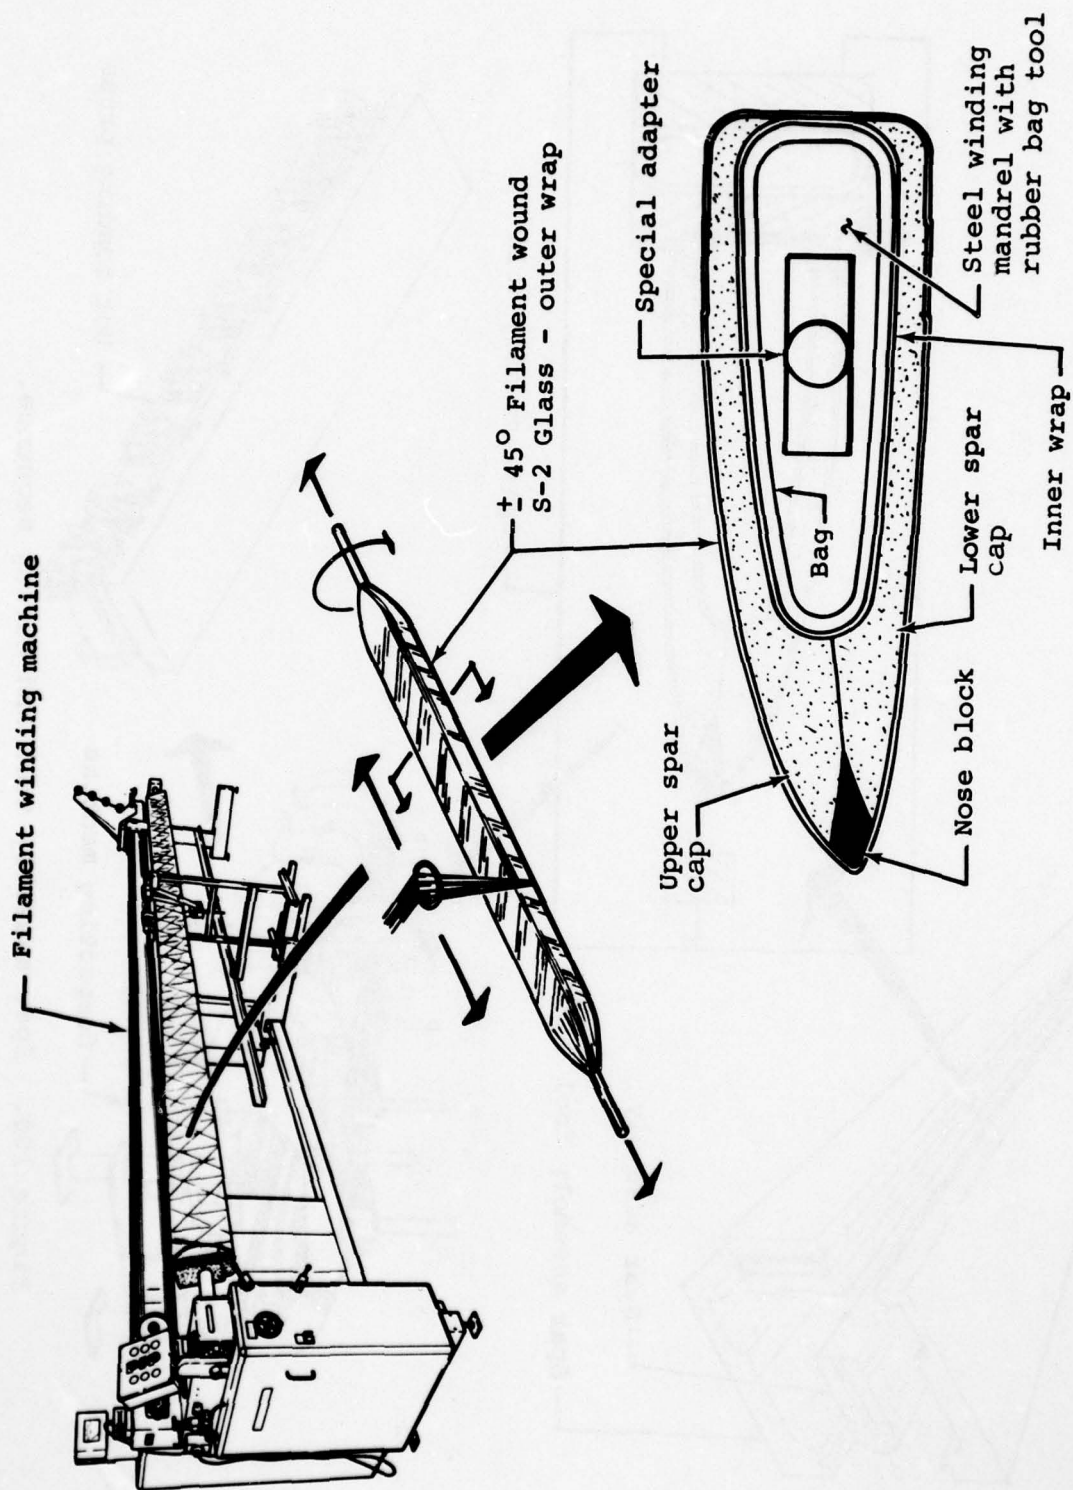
Filament-winding machine and blade spar outer torque wrap application.
